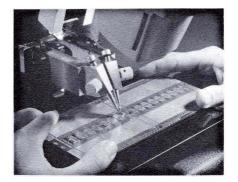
FLATPACK BEING WELDED TO MEMORY PLANE.
